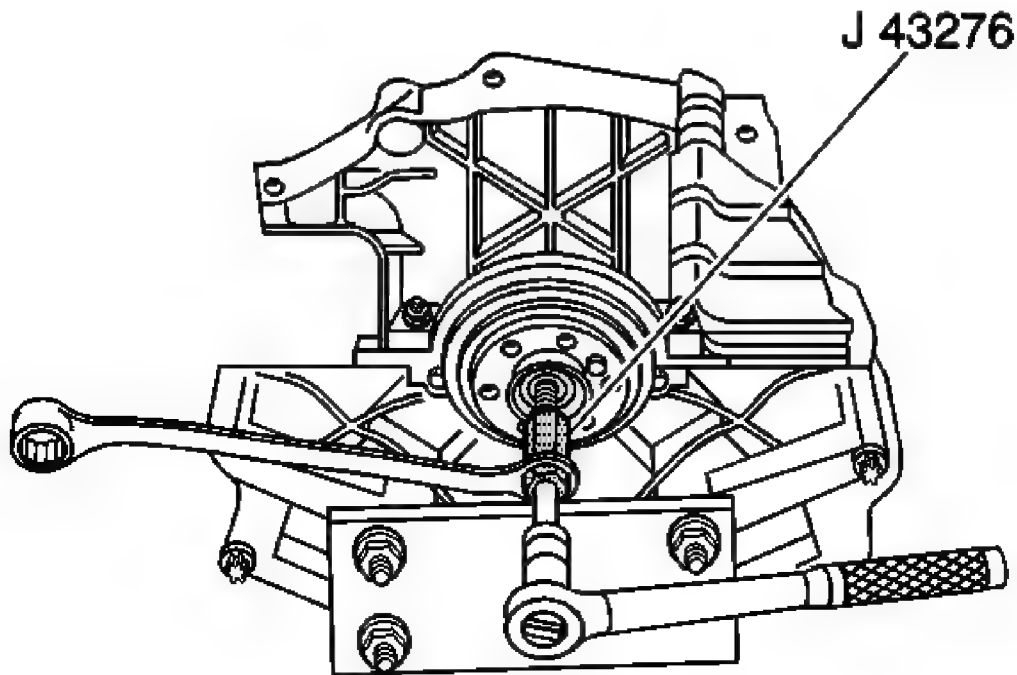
Removing Clutch Pilot Bearing Using J 43276
